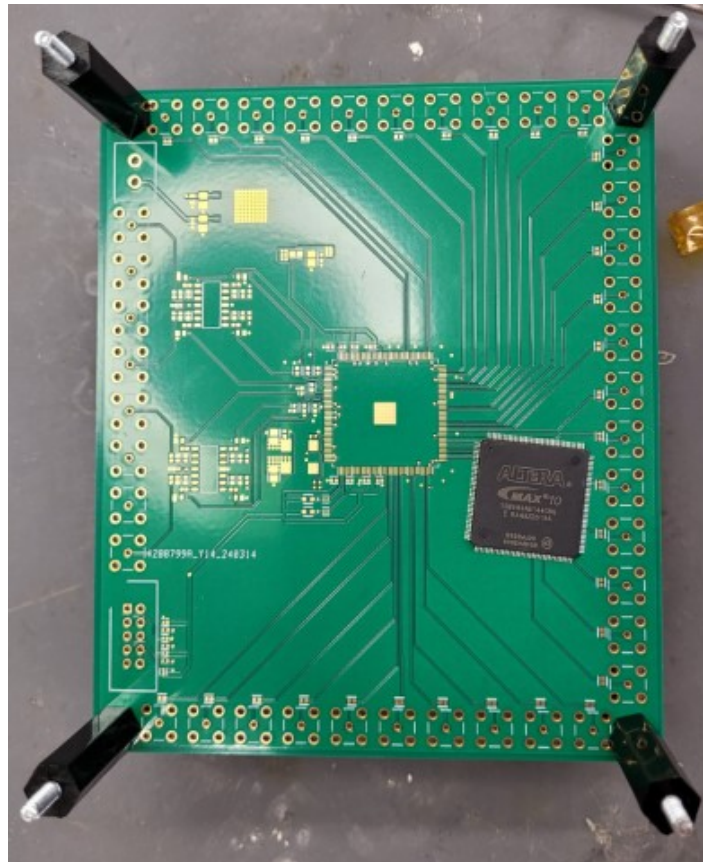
Empty Manufactured Board with Stand Legs and FPGA chip.
